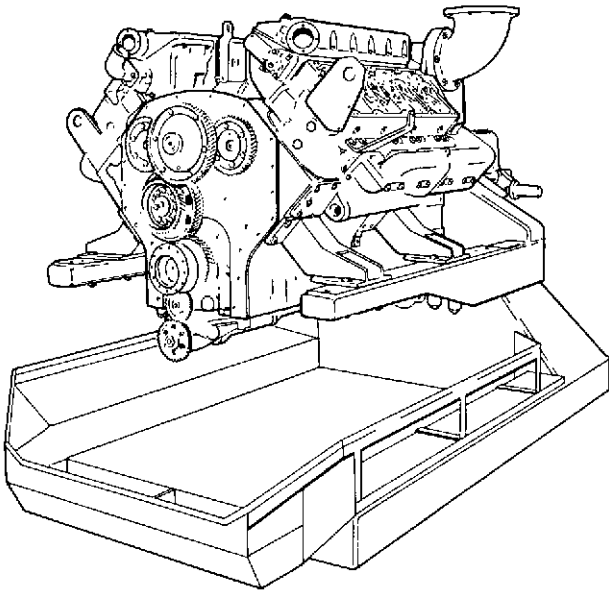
Engine in Turnover Bull Stand VP.5908.
